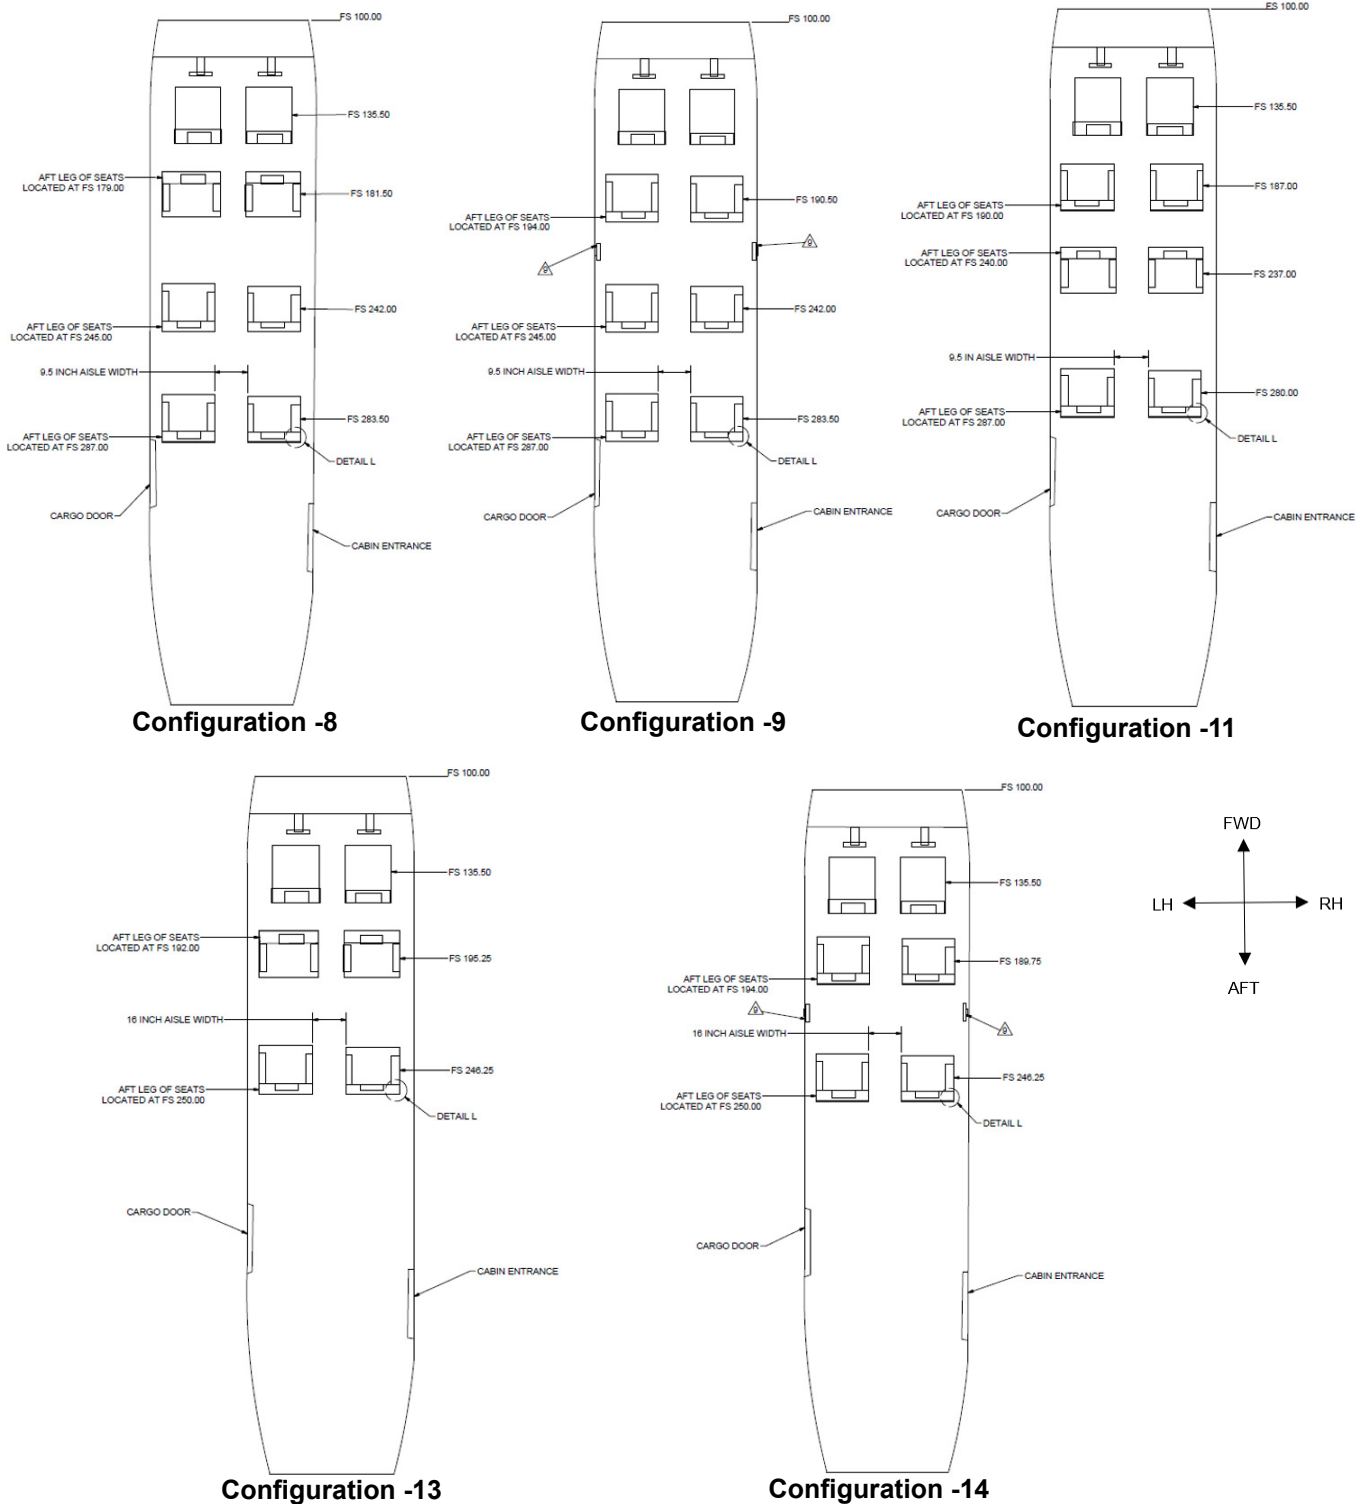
Seating Configuration -8, -9, -11, -13, and -14 (see drawing 1004845)
